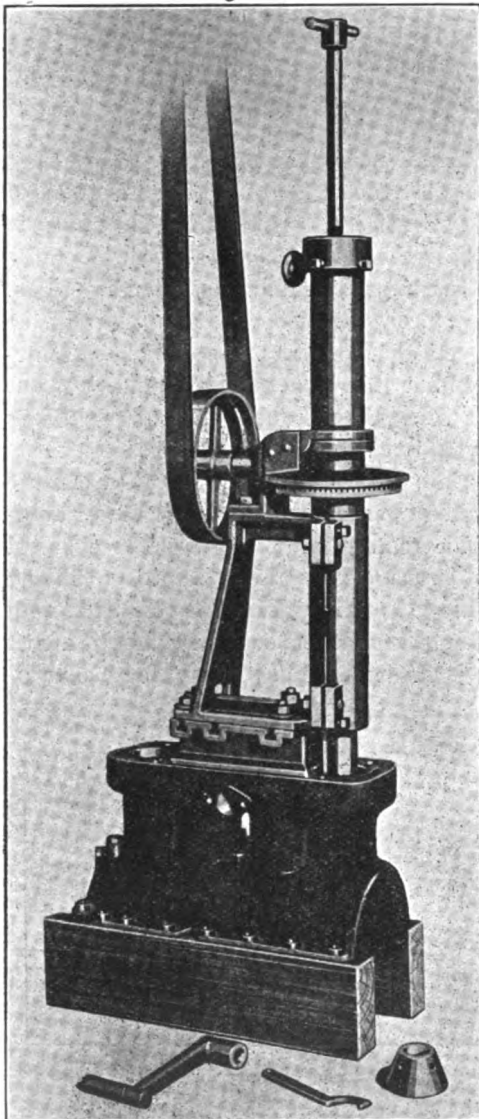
A. Portable Cylinder Re boring Machine Which Is Fitted To Handle Practically Any Size or Type of Cylinder Block.
